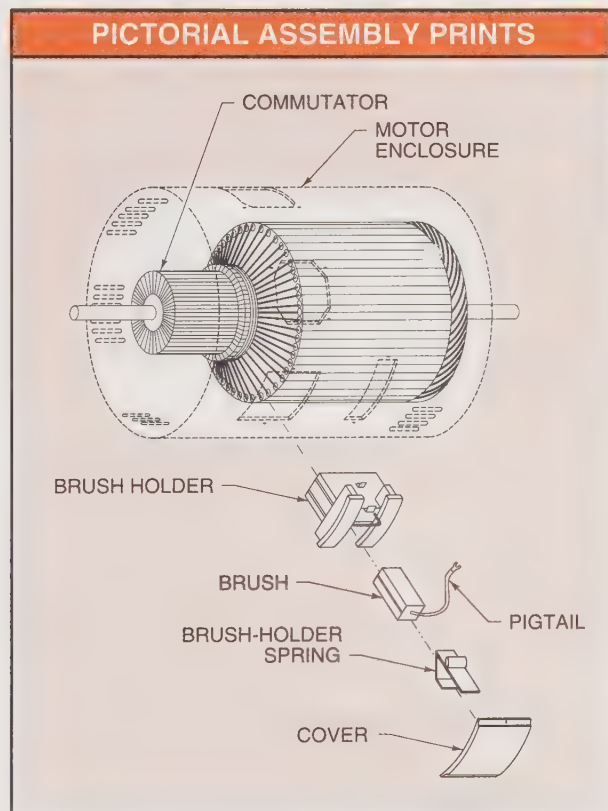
Pictorial assembly prints show how parts relate to each other.
